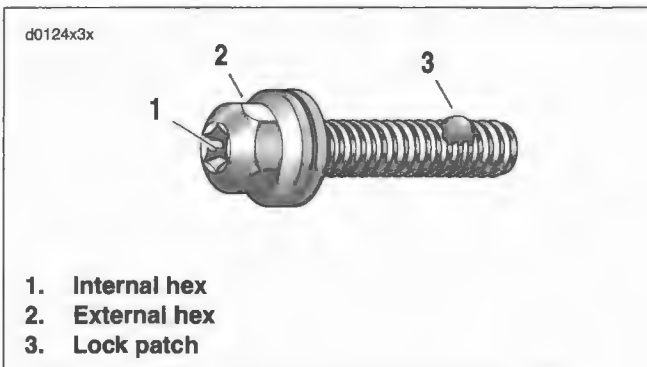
Rocker Cover Bolt (Rocker Housing Bolt Similar)
